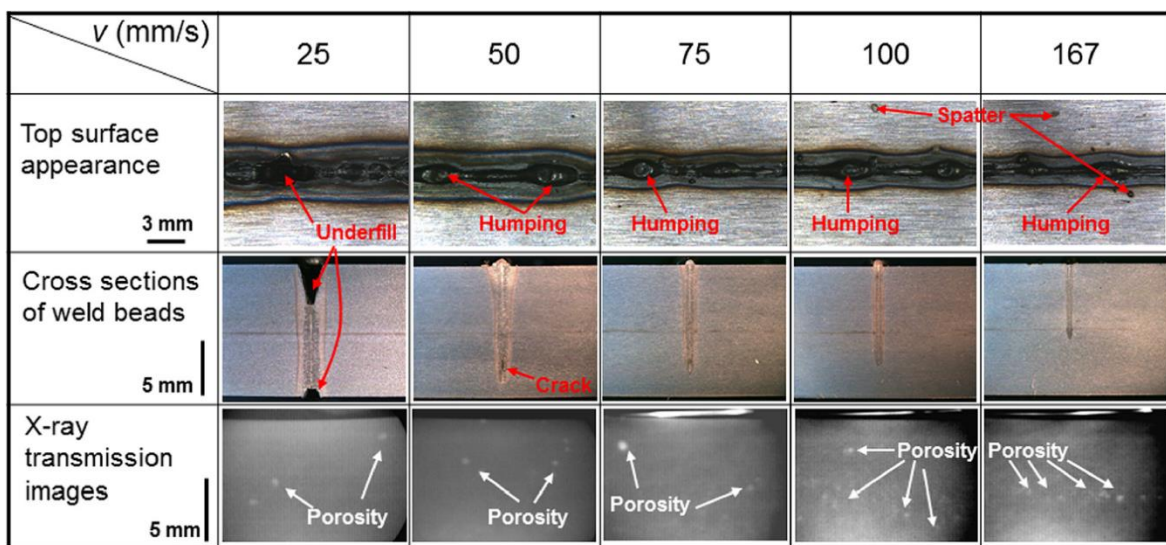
Defects of the system A produced as function of welding speed [57].
